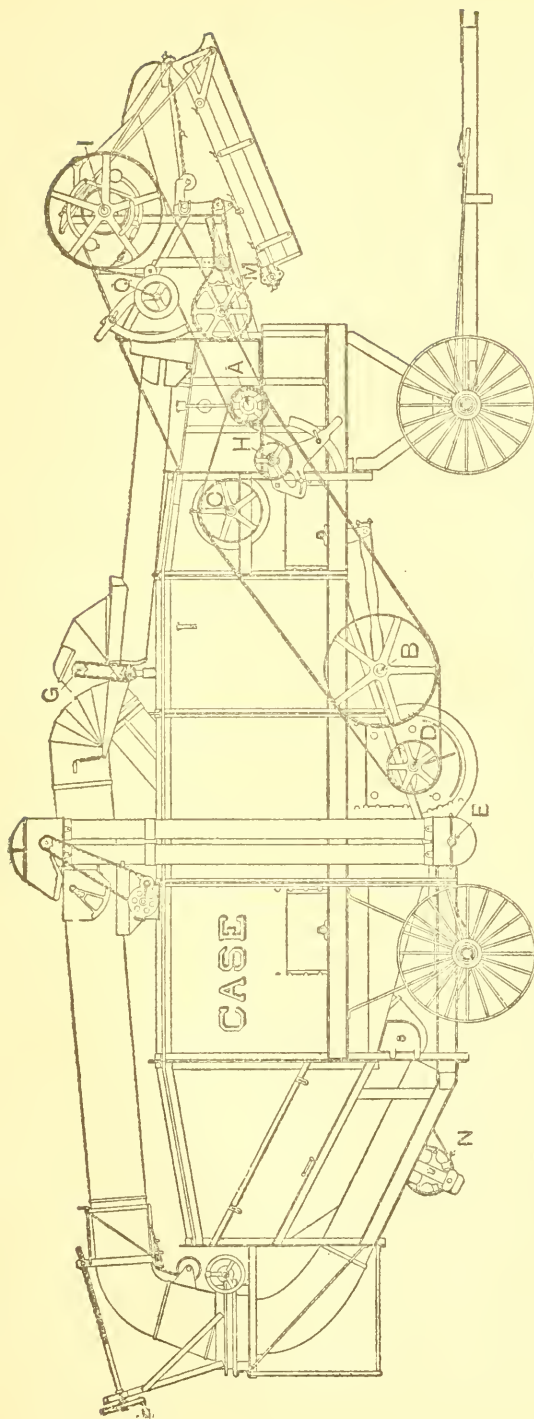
LEFT SIDE OF SEPARATOR WITH FEEDER, WEIGHER AND WIND STACKER.
